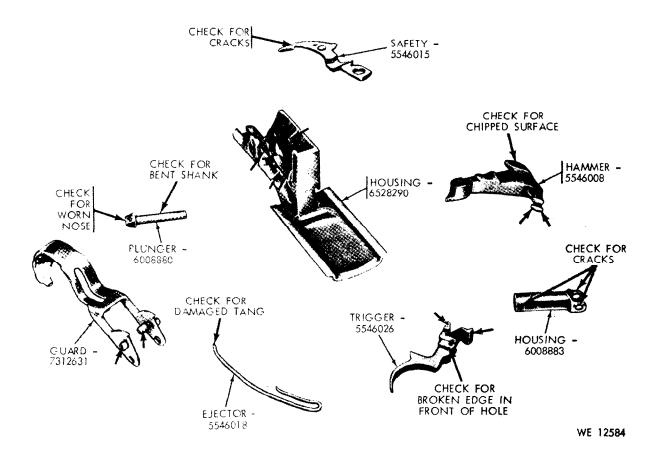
Inspection points of component parts of trigger housing assembly.
